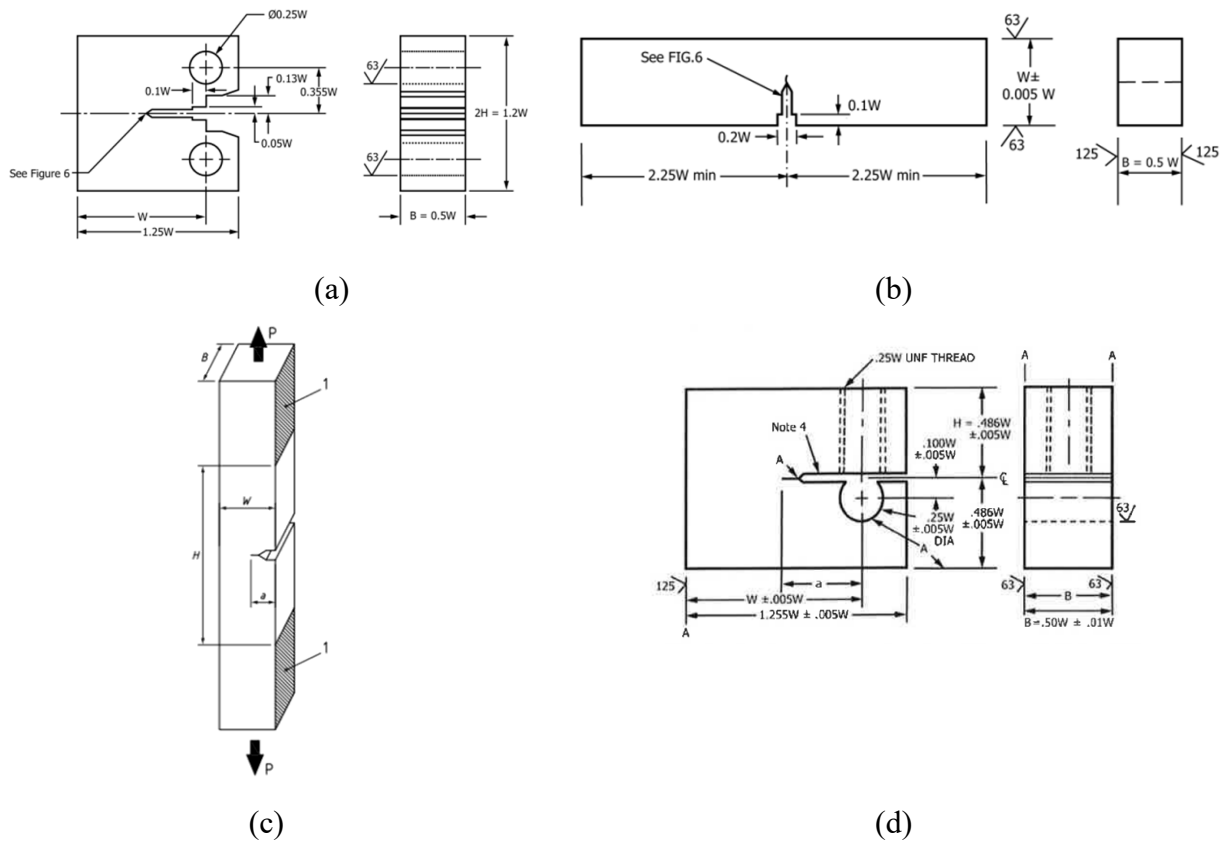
Sketches of the main specimens used for fracture mechanics testing. (a) CT [191]; (b) SENB [191]; (c) SENT [198]; (d) bolt loaded CT [186].
